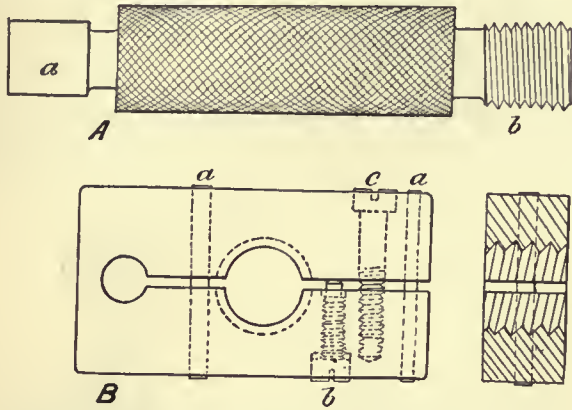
Screw Thread Gauges. (Pratt & Whitney Co.)
